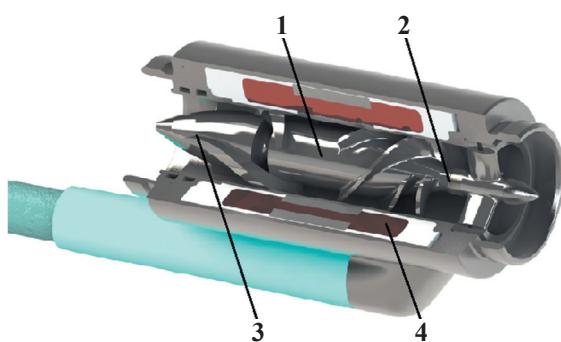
3D model of axial pump: 1, pump impeller; 2, bearing; 3, flow straightener; 4, electric motor stator
